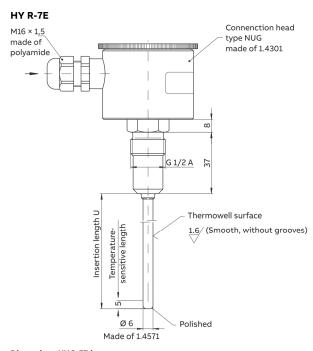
Dimensions HY R-7E in mm SensyTemp HY R-2E with G  $^{1}\!\!\!/_{4}$  A thread
